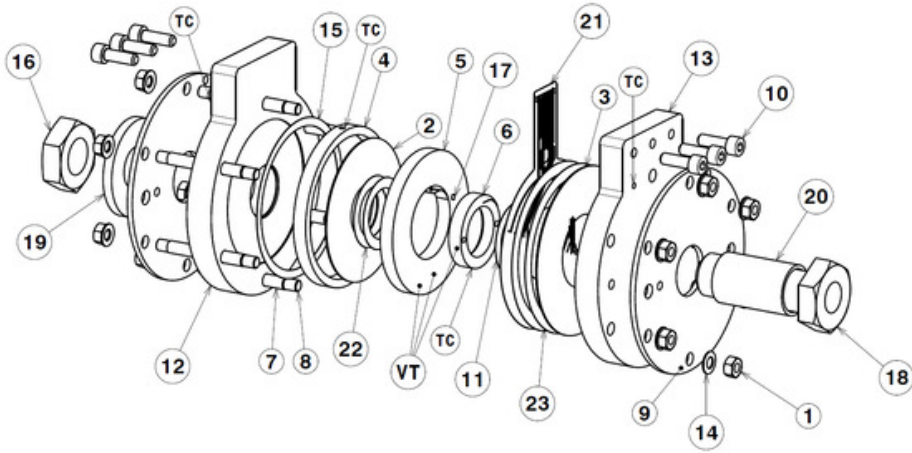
Explosion-view of the pancake coil and its encasing. (1) Stainless steel M8 nut, (2) G11 insulation plate, (3) G11 insulation plate, (4) Copper outer ring, (5) *ReBCO* coil-pack, (6) Copper inner ring, (7) Polyimide bolt insulation, (8) Stainless steel tie-rod, (9) G11 insulation disk, (10) Stainless steel M10 bolt, (11) G11 insulation ring, (12) Copper plate, (13) Copper plate, (14) Phosphor-bronze spring washer, (15) G11 insulation layer, (16) Stainless steel M30 nut, (17) Stainless steel pin, (18) Stainless steel M30 bolt, (19) M30 washer, (20) Polyimide insulation, (21) Trace, (22) Polyimide layers, VT = voltage tap, TC = temperature sensor.
